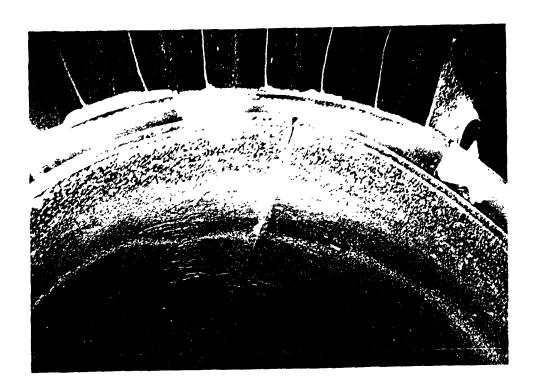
Crack in the seam weld of the H3 burner nozzle tip.
